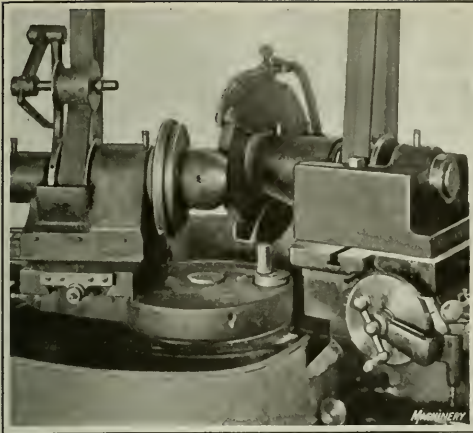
Grinding the Outer Radius on a Universal Joint Cover
